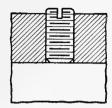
Plug may mar the shaft • to the extent that disassembling might be impossible. The smooth surfaces of the hole are scored.
